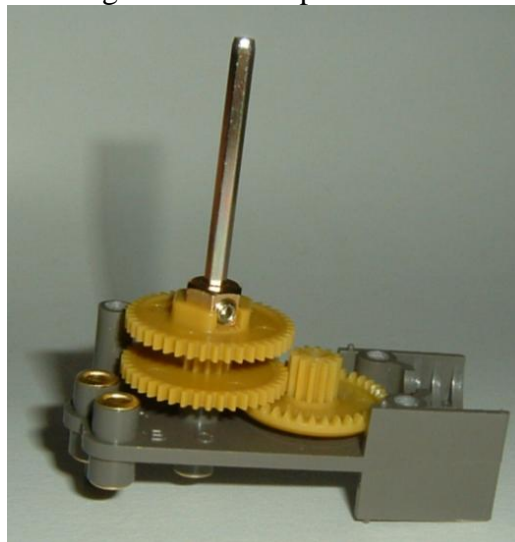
First 3 Gears Mounted on One Side of Center Bracket of Gearbox
